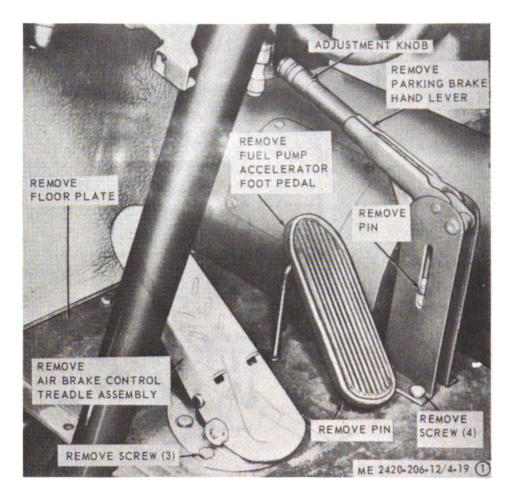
Parking brake hand lever and cable, removal and installation (sheet 1 of 2).
